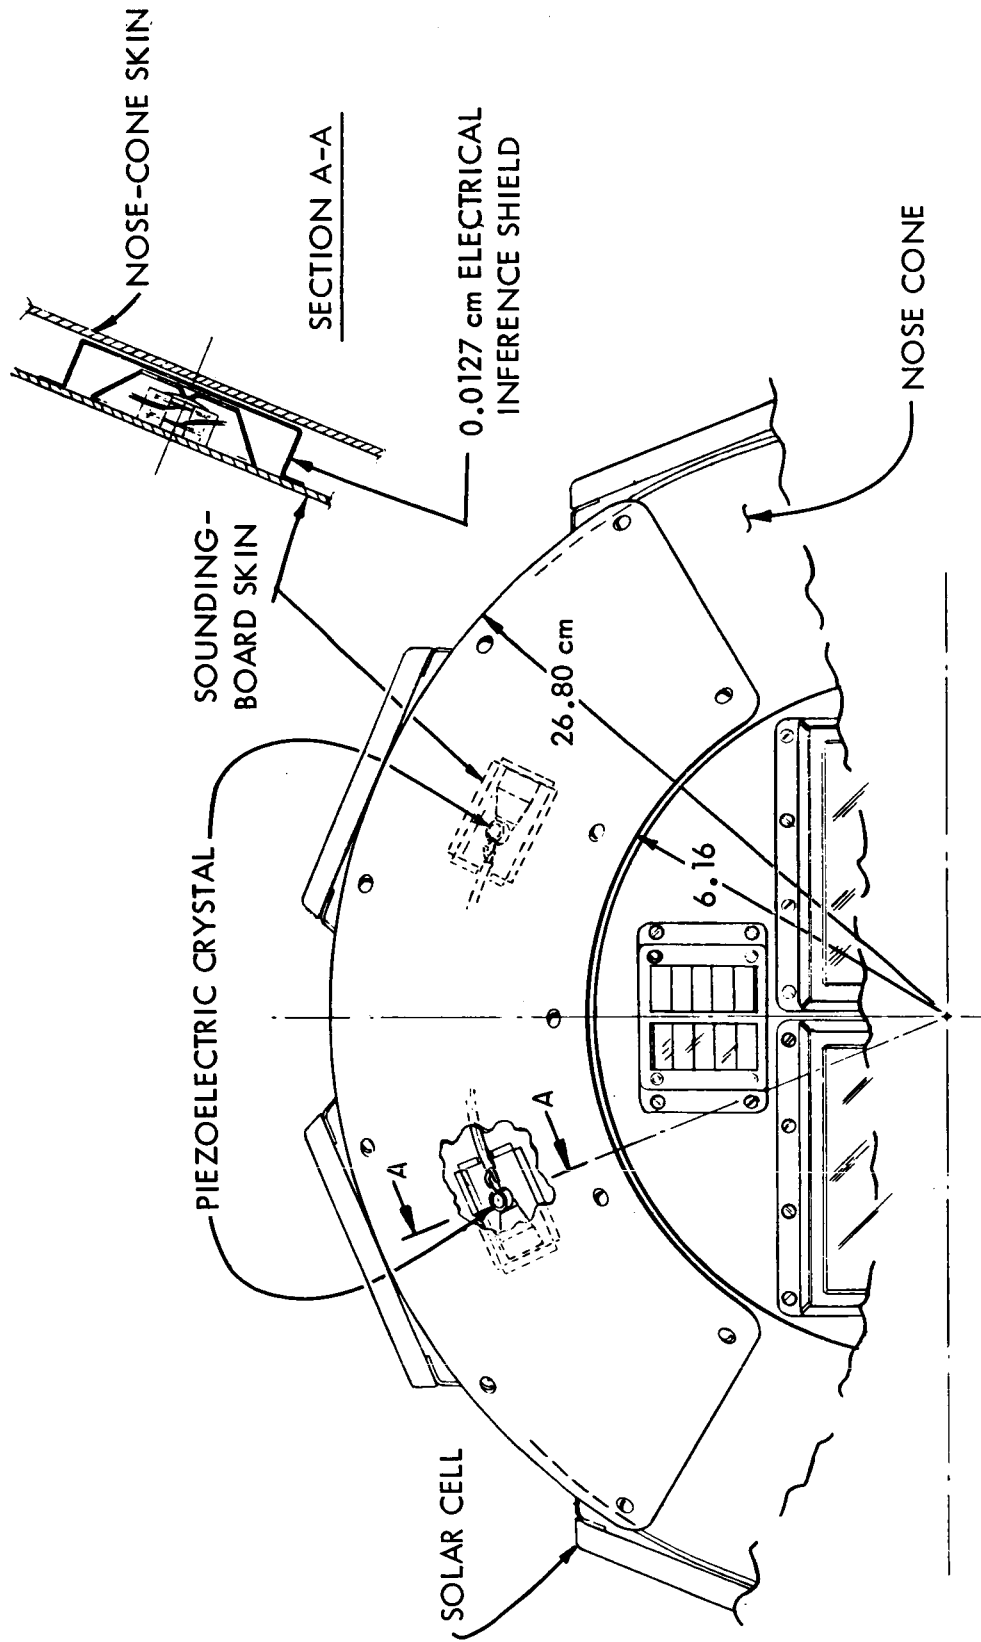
SKETCH OF IMPACTING DETECTOR EXPERIMENT MOUNTED UNDER "SOUNDING BOARDS".
